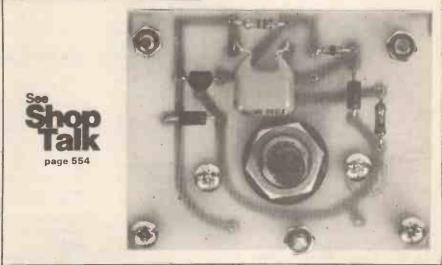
(above) Component layout for the Soldering Iron Power Controller.
